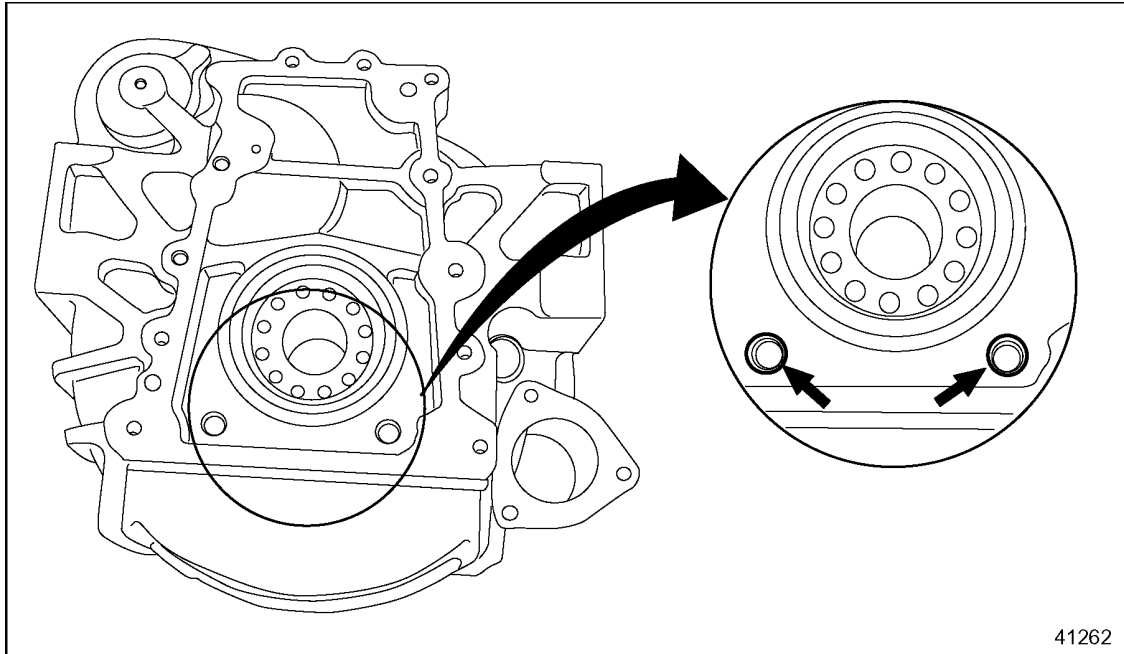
No Pipe Plug in these Two Threaded Holes
